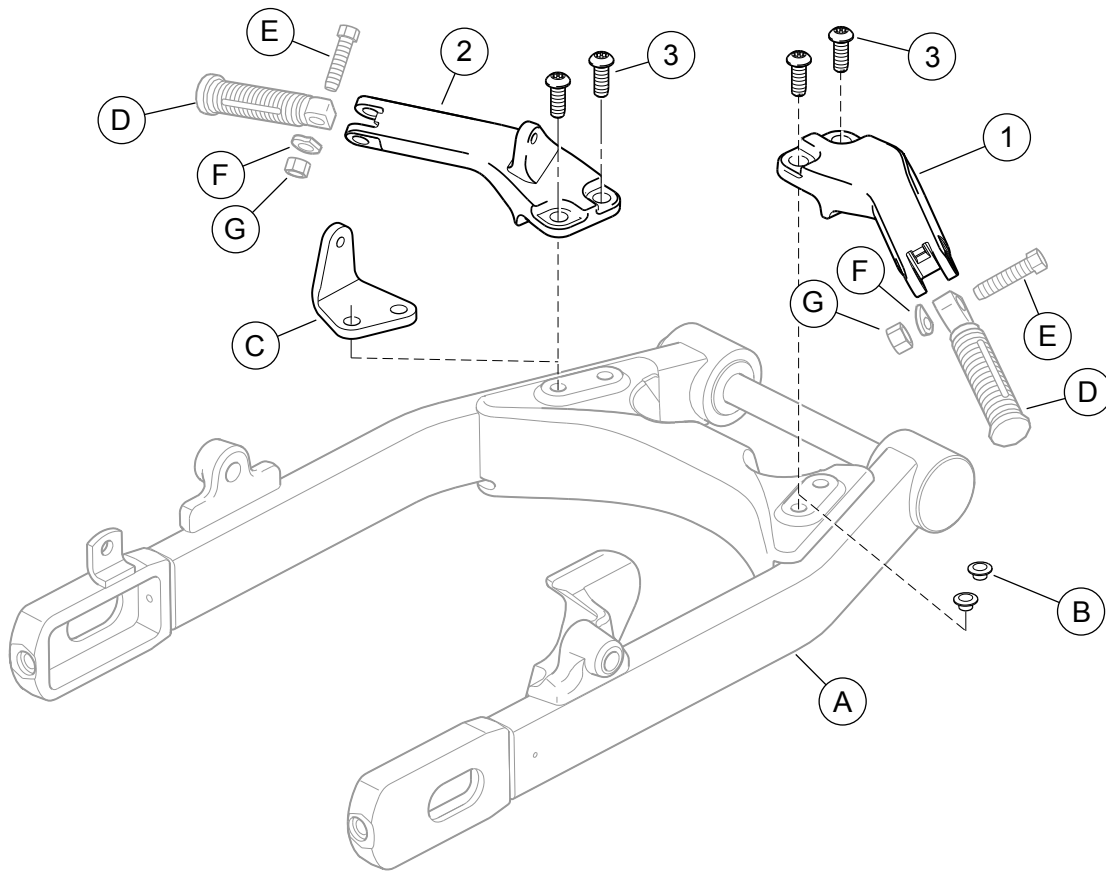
Service Parts: Passenger Footpeg Mounting Kit
